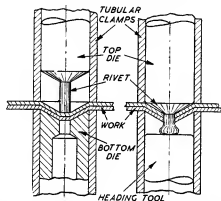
Two stages in the punch-riveting process, showing (on left) the rivet, having depressed the sheets into the bottom die, and about to pierce the hole, and (on right) rivet held in place by top die for the heading operation.
